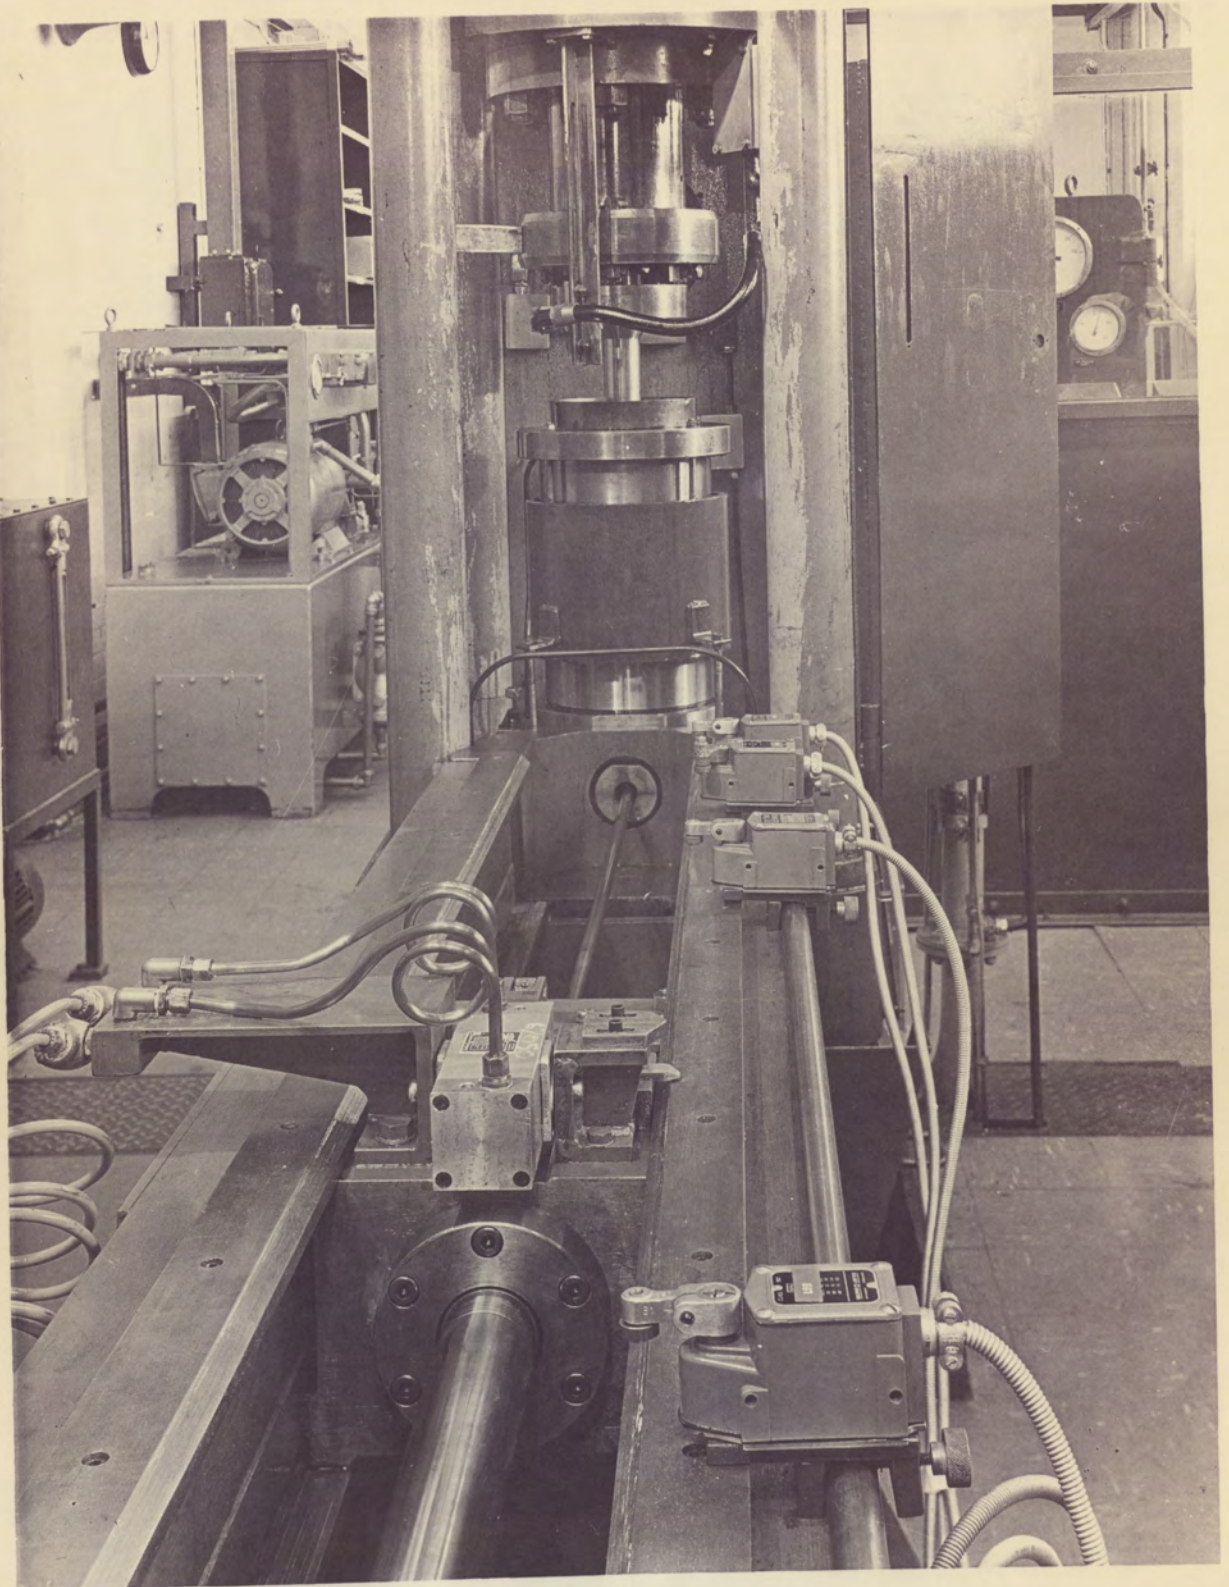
MACHINE FOR PRODUCT AUGMENTED HYDROSTATIC EXTRUSION
